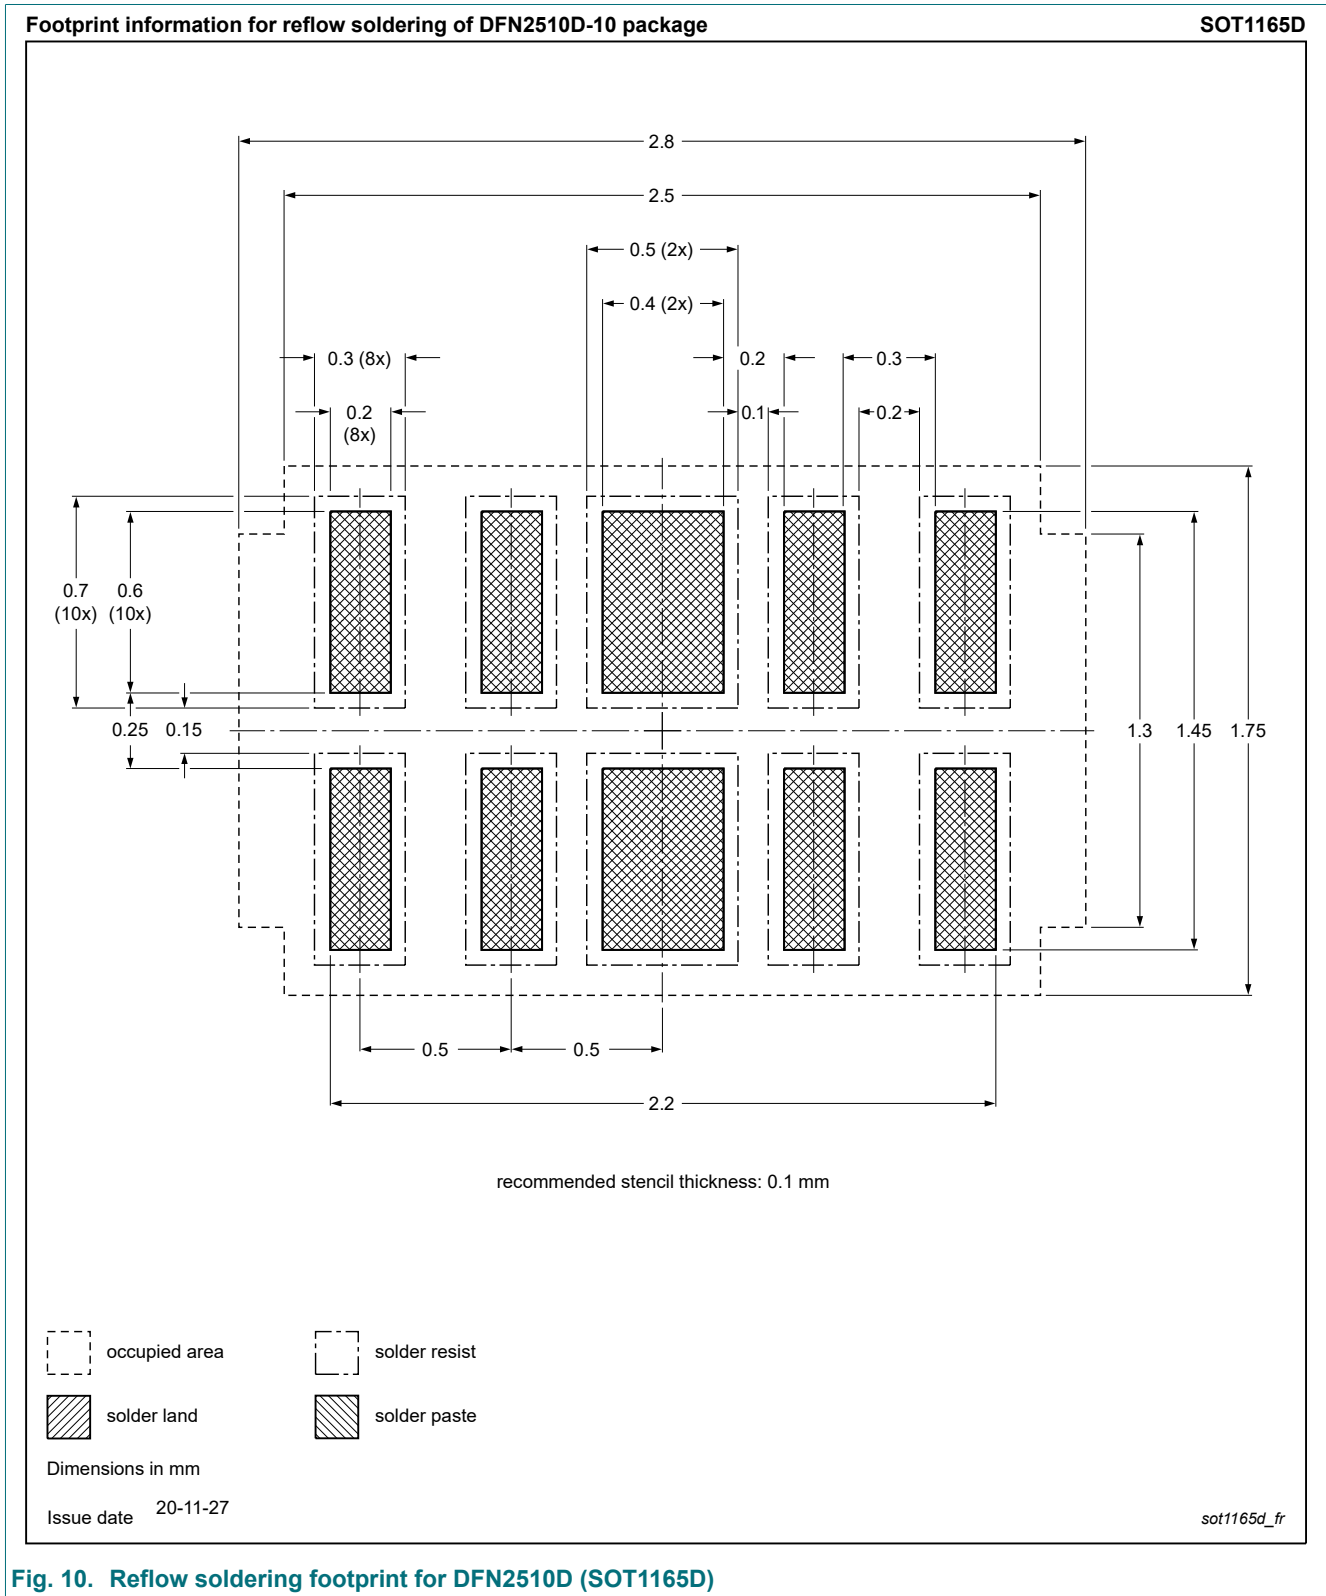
Reflow soldering footprint for DFN2510D (SOT1165D)
